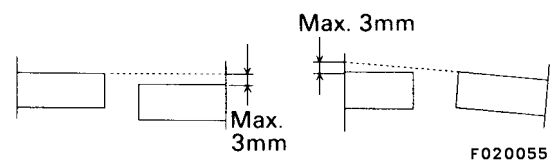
MAXIMUM SHAFT MISALIGNMENT
